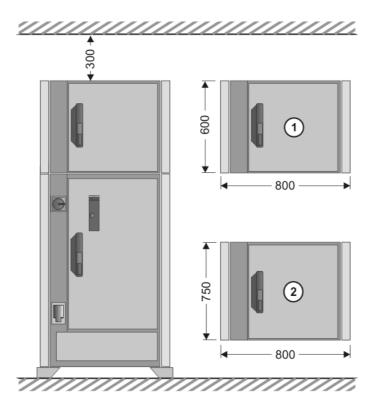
Minimum clearances with top-mounted / technology cabinet
